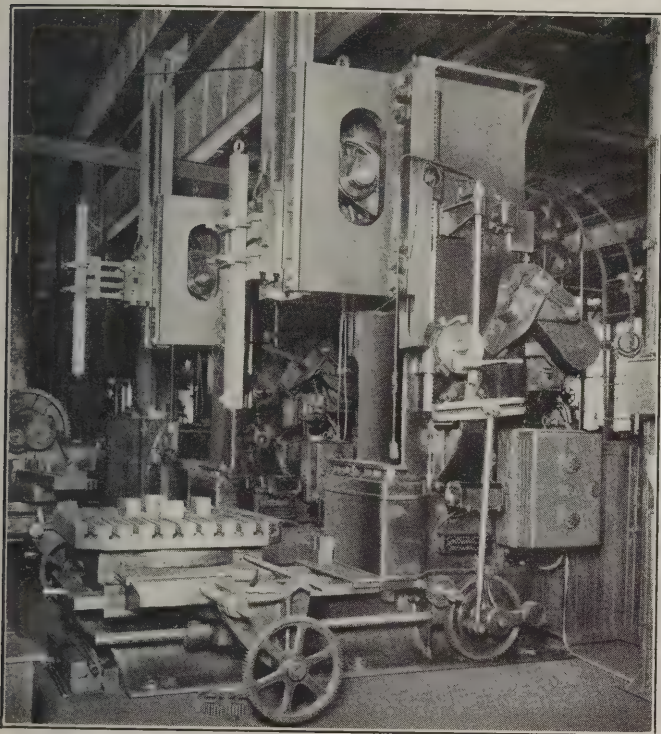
Slotter Driven By 15 Hp. Adjustable Speed Reversing Planer Motor
